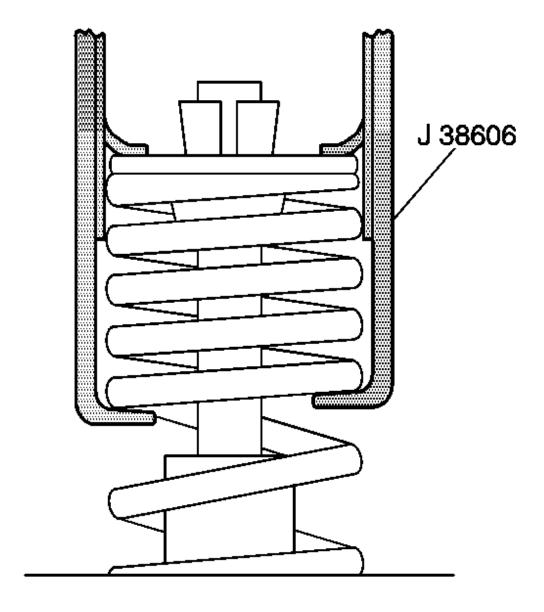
Compressing Valve Spring Courtesy of GENERAL MOTORS CORP.
